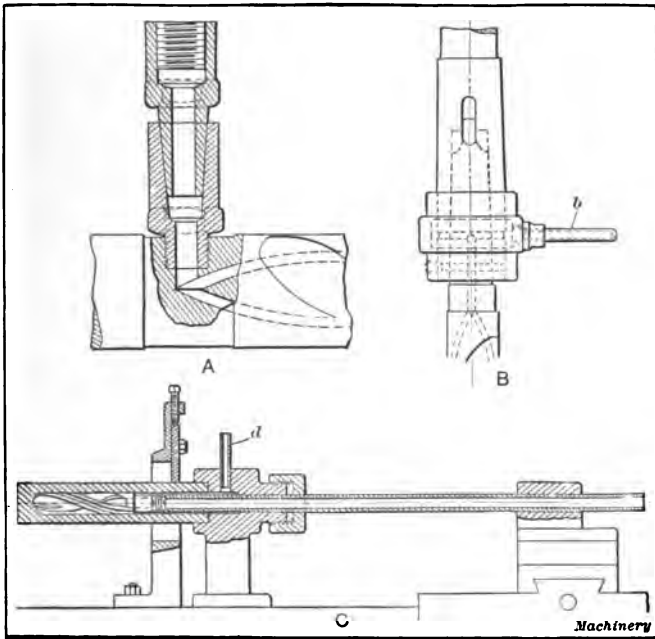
A, Connection to Oil Passages of Stationary Drill; B, Connection to Oil Passages of Rotating Drill; C, Method of Lubricating Hollow Drill for Deep Hole Work
